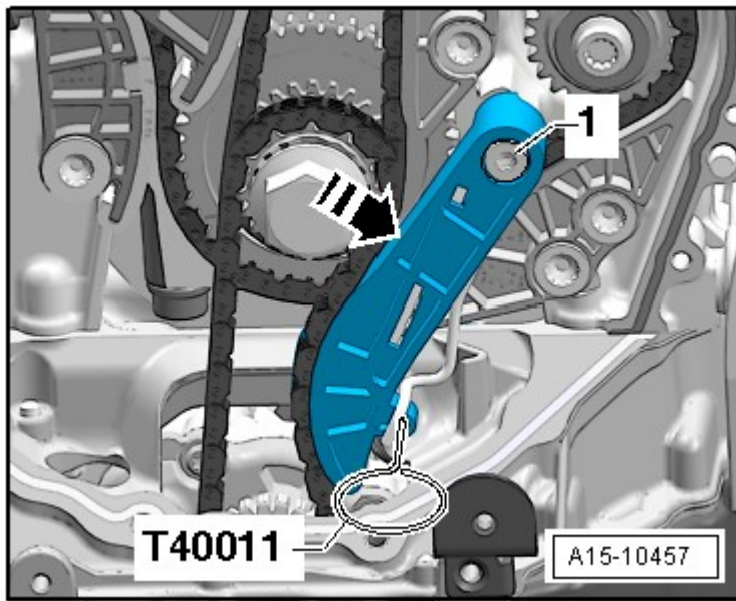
Identifying Oil Pump Chain Tensioner And Locking Pin T40011
